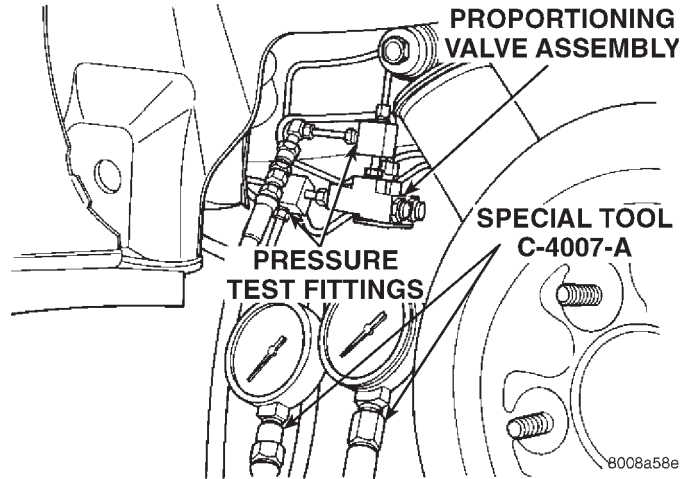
Pressure Gauges Installed On Pressure Test Fittings
